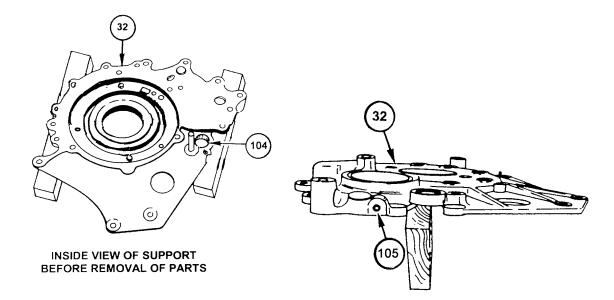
Right Brake Support Assembly. Figure 39. Right Brake Support Assembly.
